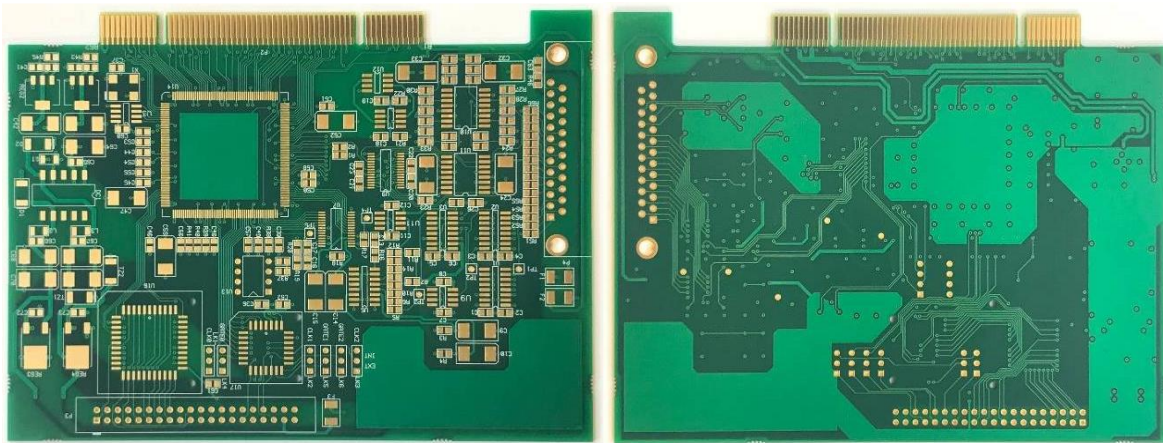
Custom made PCB Left - Top side of the PCB; Right - Bottom side of the same PCB.
